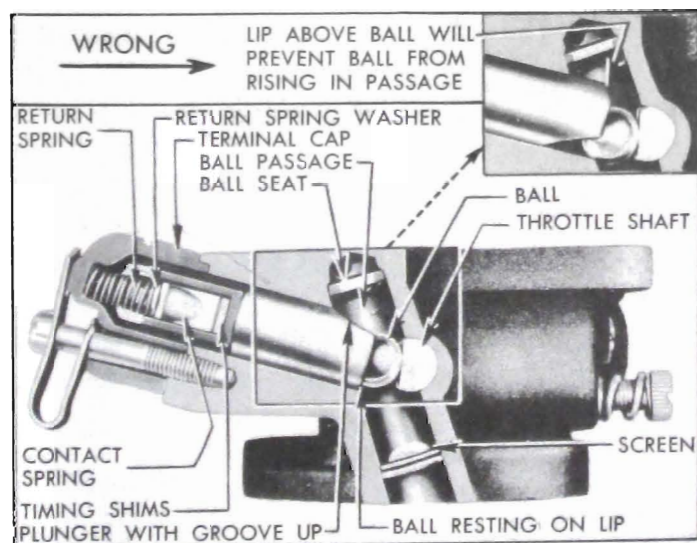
Assembly of Carter Accelerator Vacuum Switch
